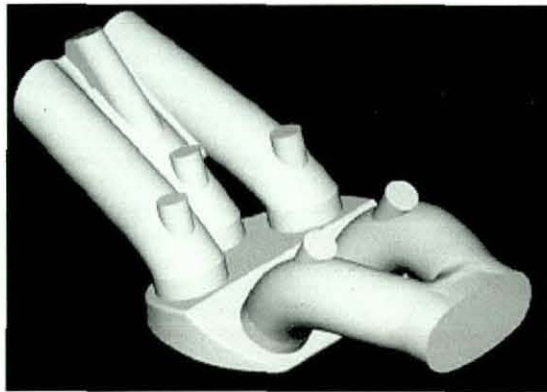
5-valves per cylinder head layout of the Ford modular V6
